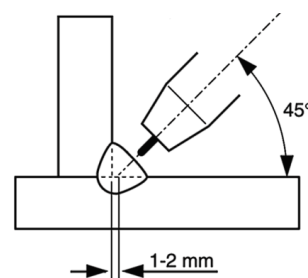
Torch angle and position across the welding direction at T-joint fillet welding [20]
